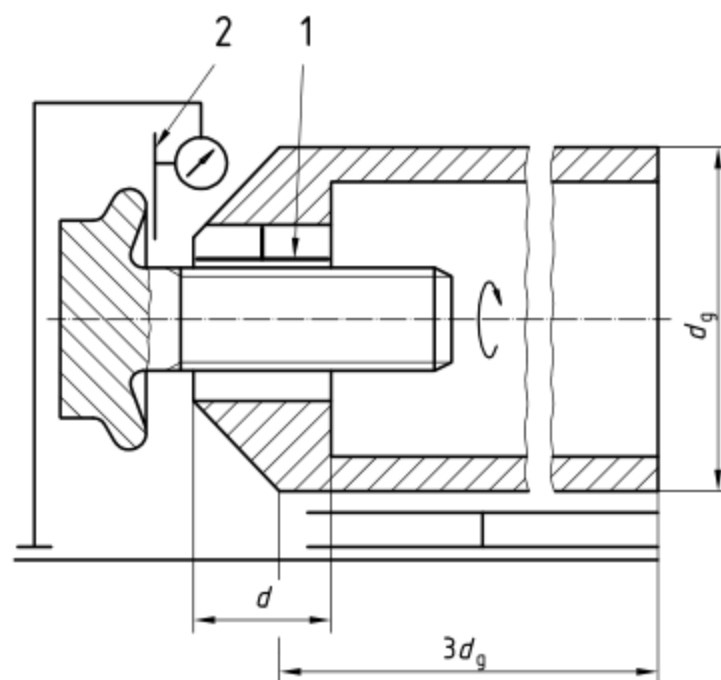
Gauge for verifying position tolerance specified in Figures 44, 45 and 46
